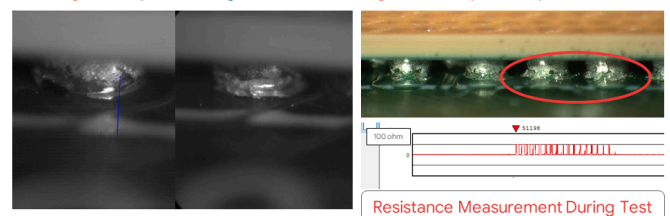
Evidence of fracture under BGA Solder Joint during testing
